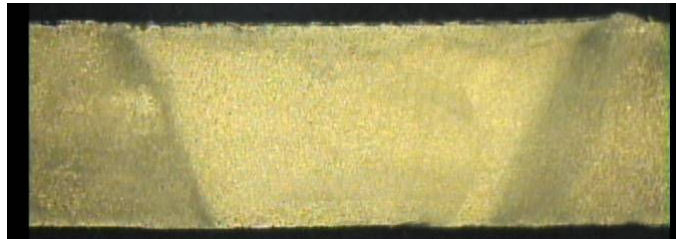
Cross section of weld produced under plunge depth force control mode.
